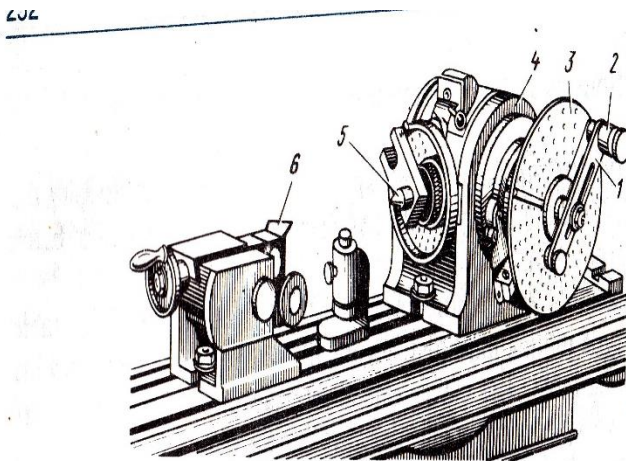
Index-plate universal dividing head: 1 — index crank; 2 — index-crank pin; 3 — index plate; 4 — housing; 5 — spindle; 6 — tailstock
